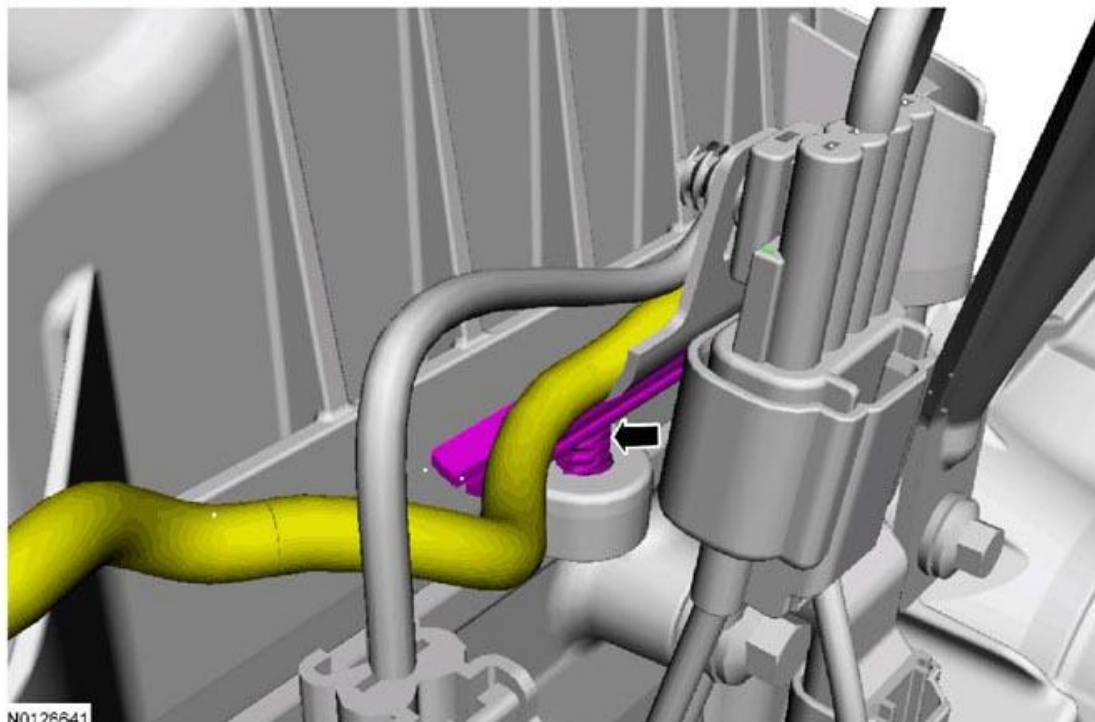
Locating Heated Oxygen Sensor Connector And Retainer
